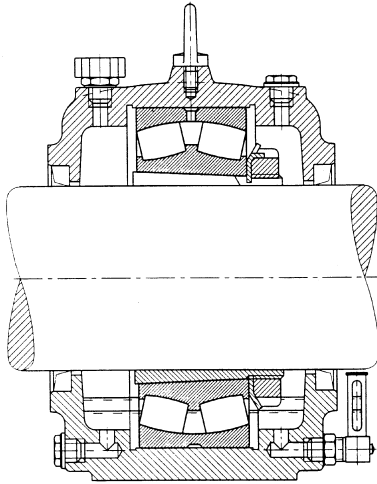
Bearing housing of a ship shaft (from FAG, 1998, with permission of FAG and Handel AG).
